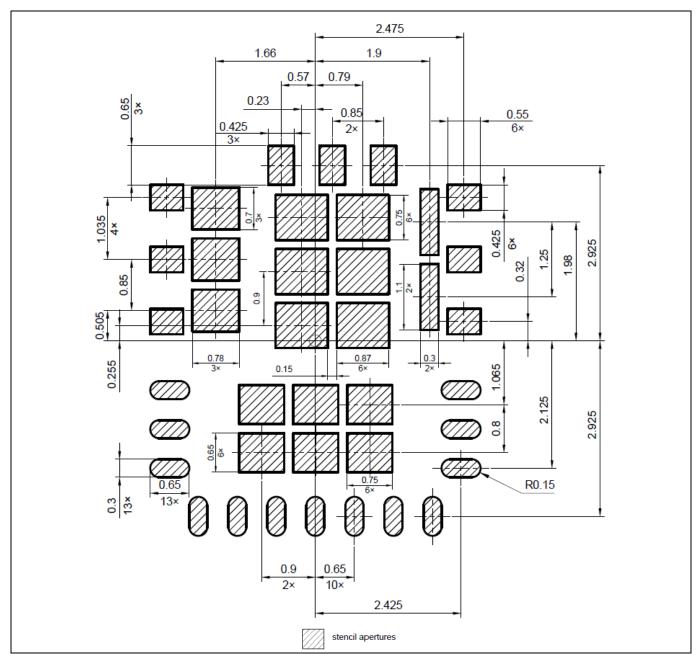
Stencil pad size and spacing (all dimensions in mm)
